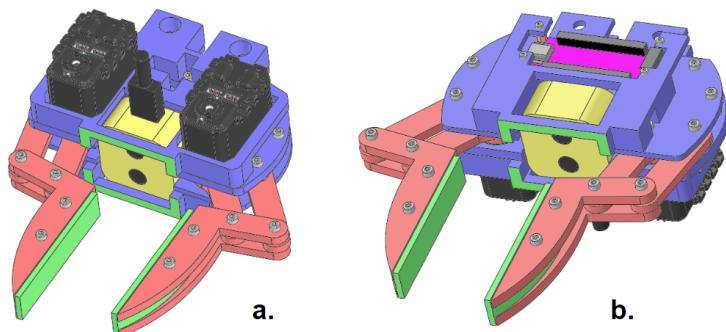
a. top view of the final gripper assembly b. bottom view of the final gripper assembly
